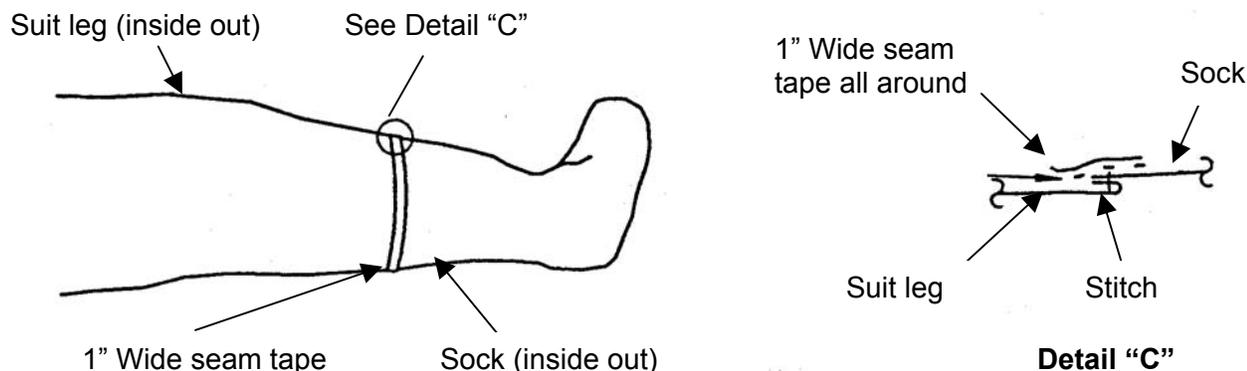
Steps c and d. Fitting of Immersion Socks
